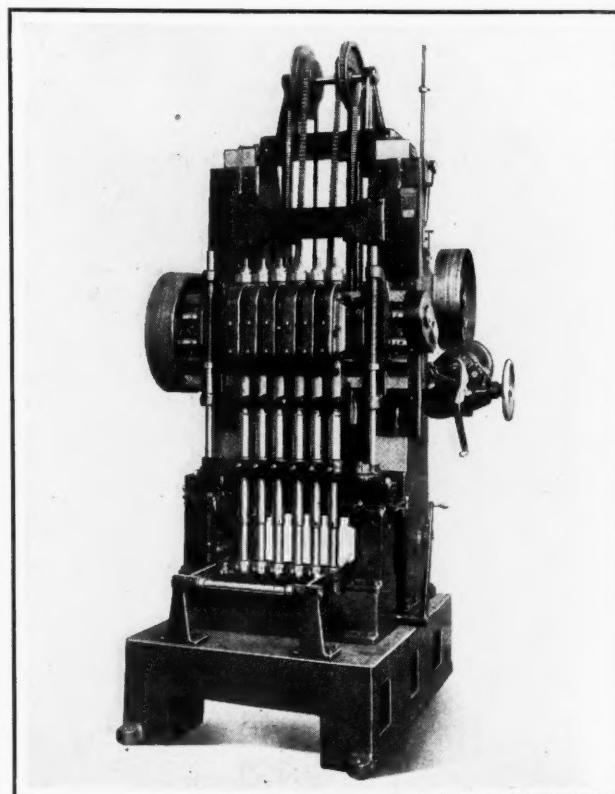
Moline Automatic Geared-feed Cylinder Boring Machine
